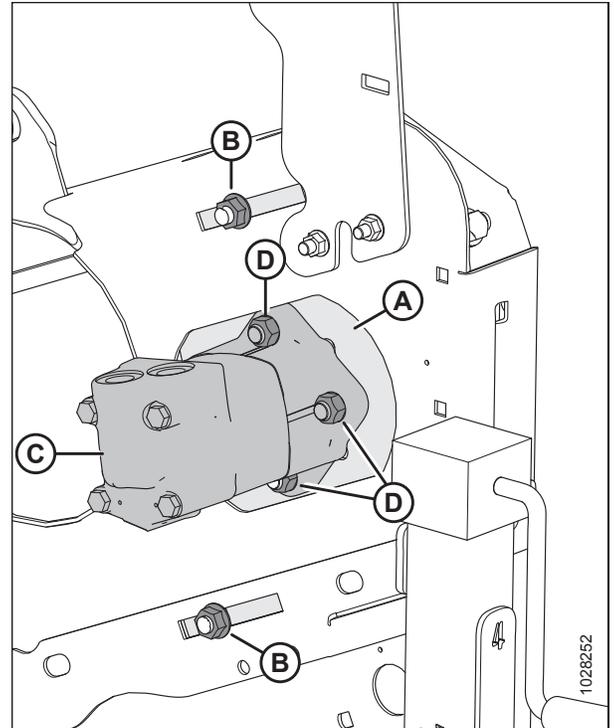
Knife Drive Motor – Double-Knife Header, View from Rear
